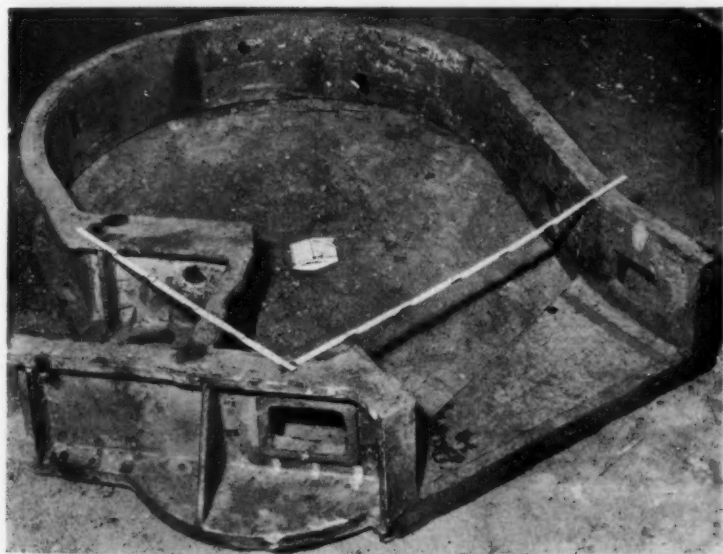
CASTING USING CORE SHOWN IN FIG. 22.
